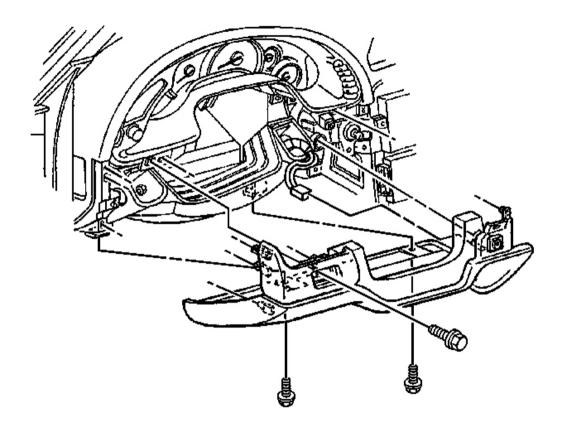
TORX(R) Head Screws, Lower Trim Cover & Driver Knee Bolster Trim Panel Courtesy of GENERAL MOTORS CORP.
